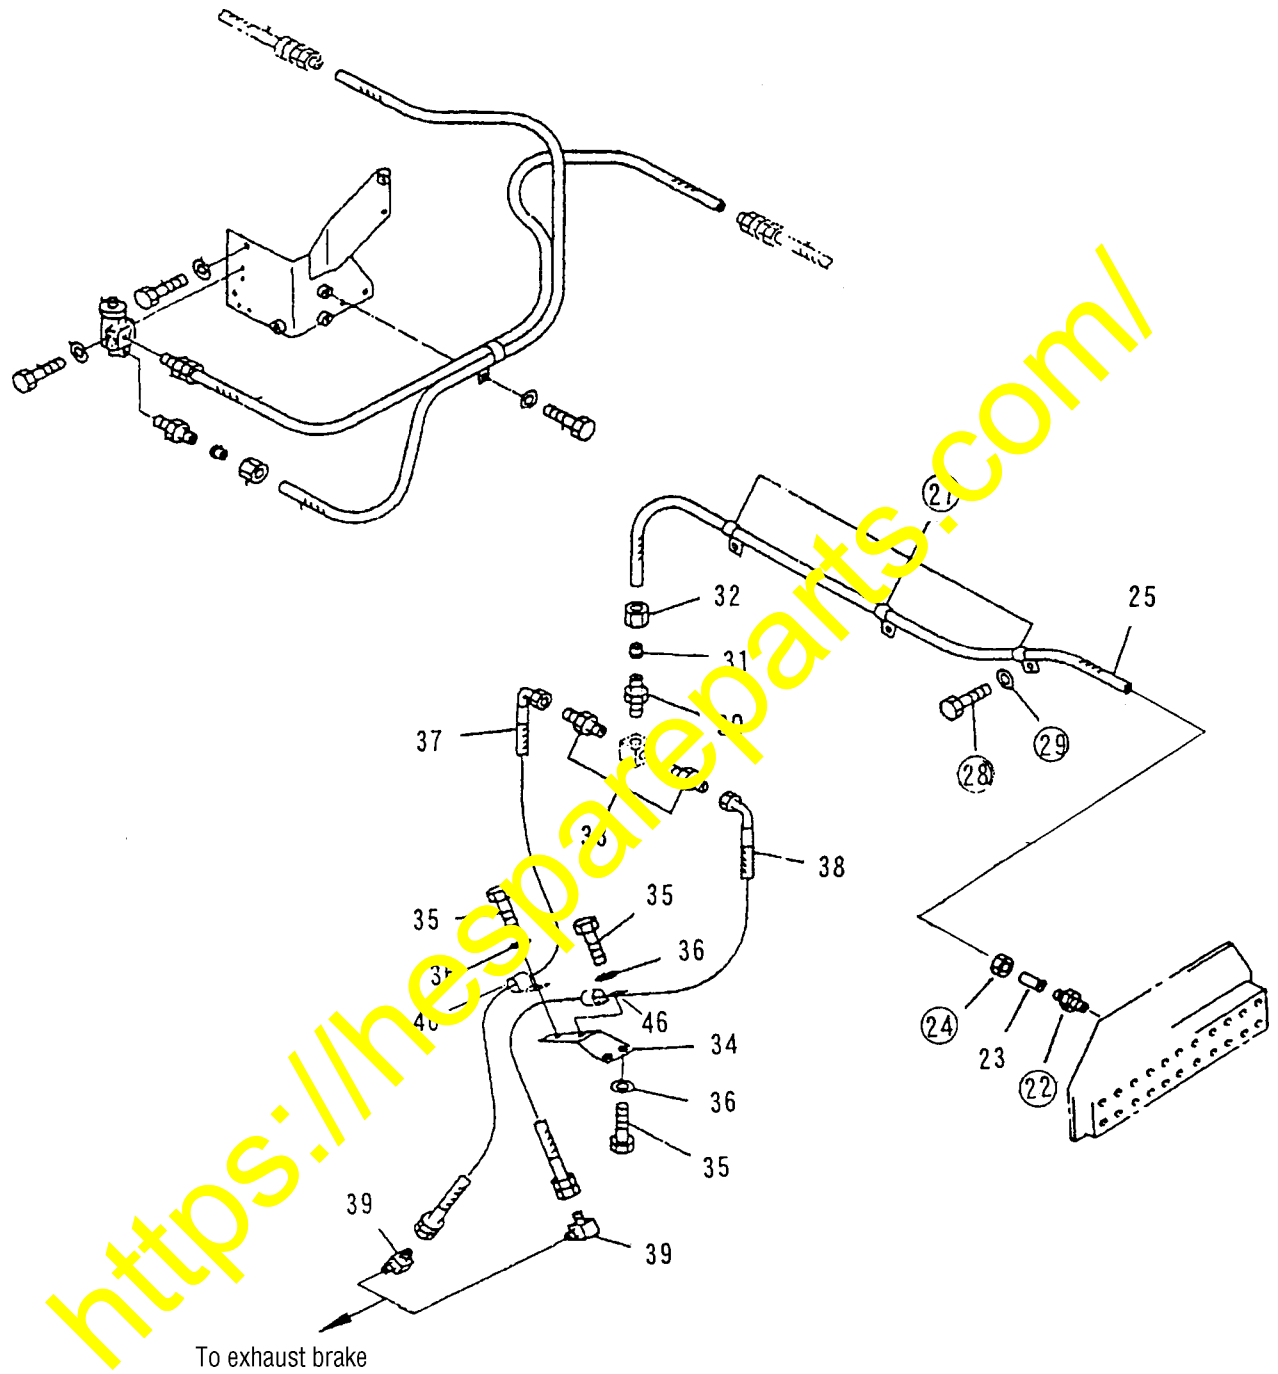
Schematic diagram for the piping parts which need to be installed for this modification (Air pipings)
